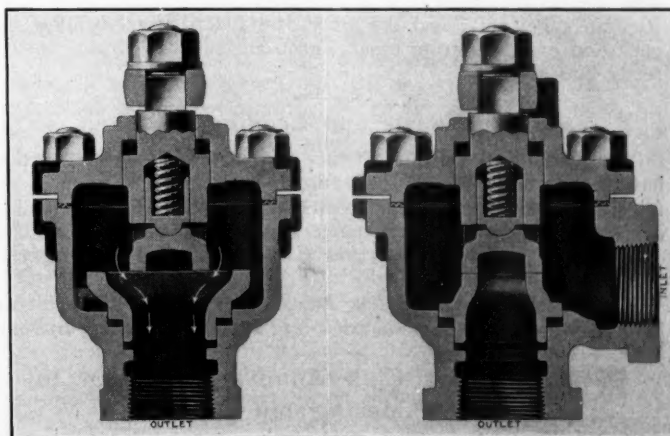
Valve Open, Fluid Passing Into Uncovered Openings in Seat (left). Fig. 2—Valve In Closed Position
